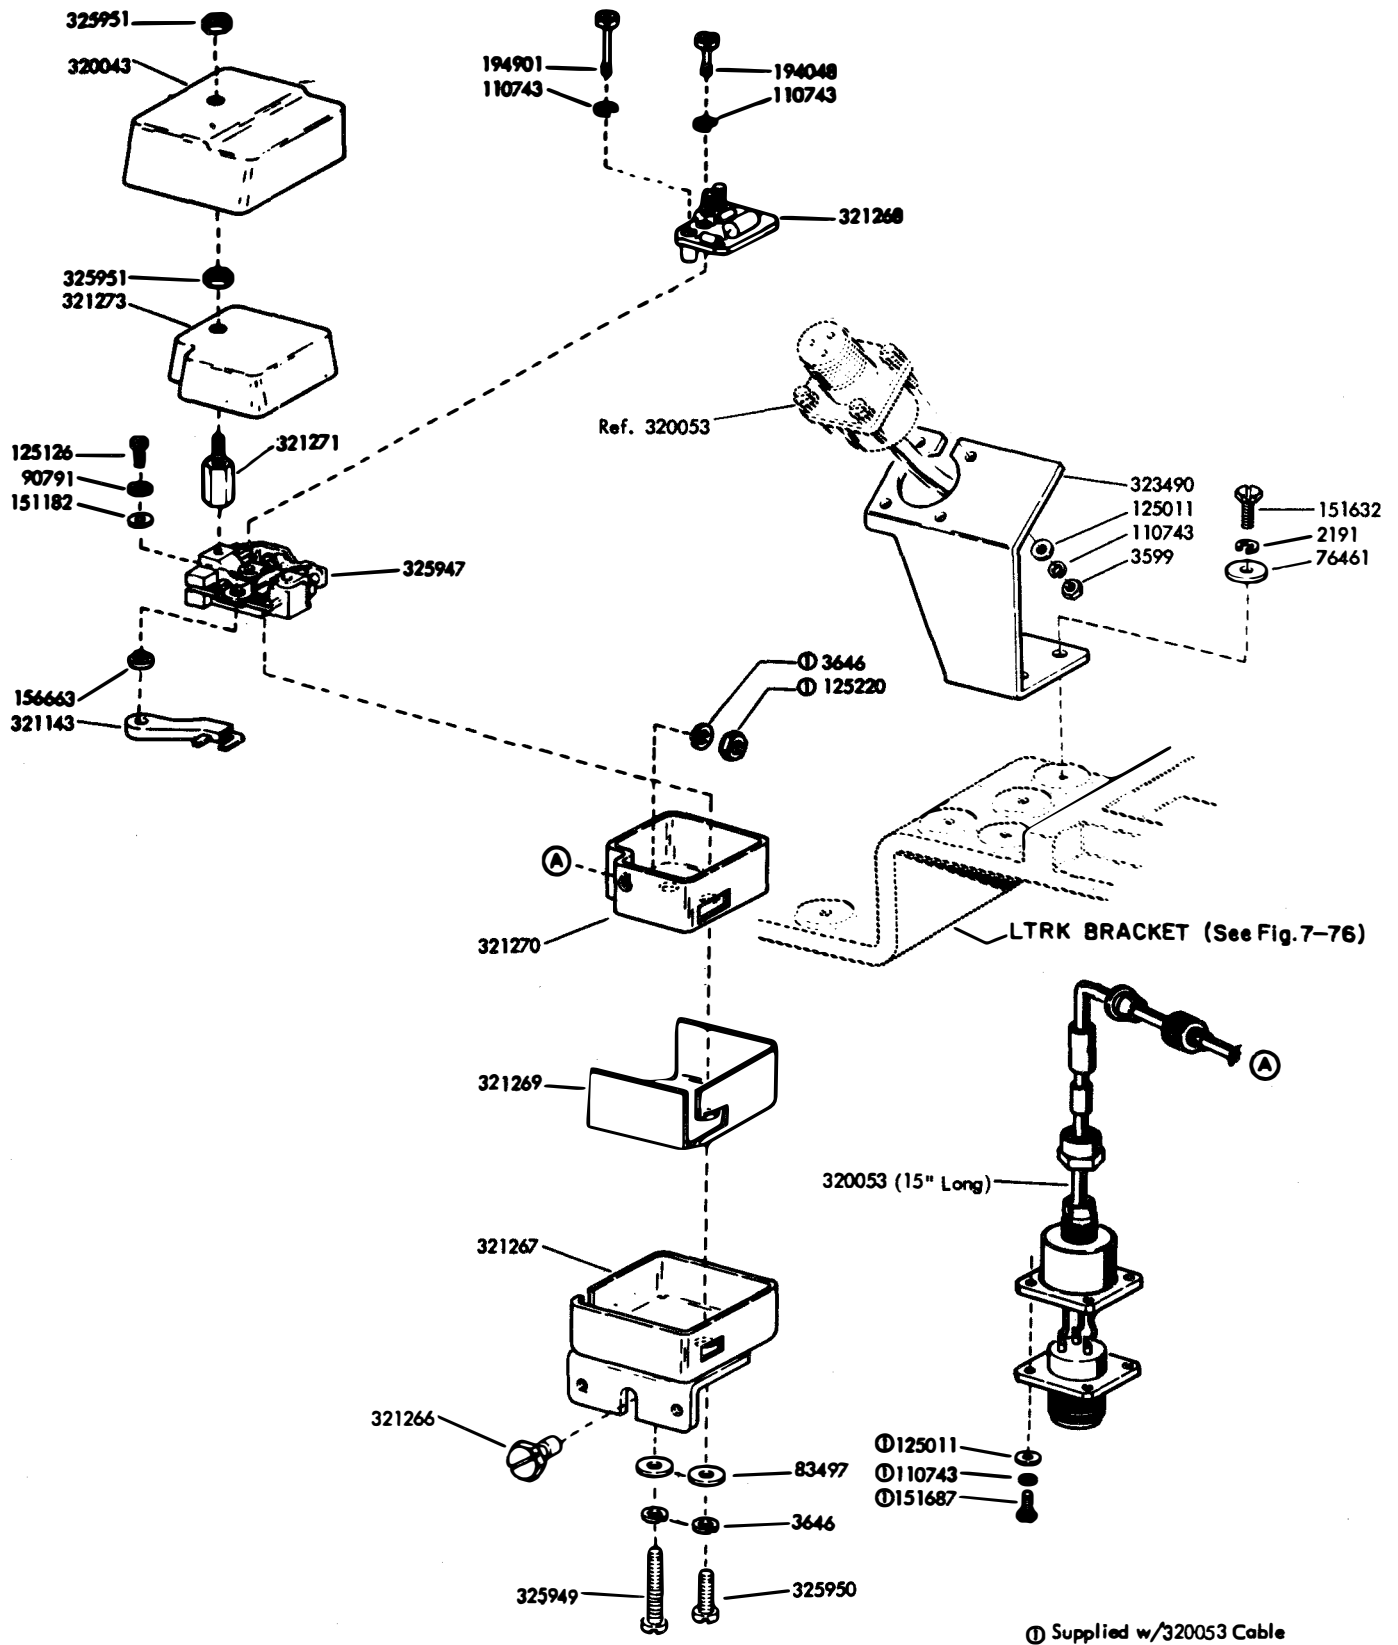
Contact Box Assembly 323645 (LTRK) - Used on Low-Level Sets
